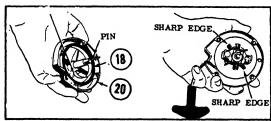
ENGINE ROTATION VIEW FROM STARTER SIDE. (Reference numbers shown on Legend, Figure 32.)
